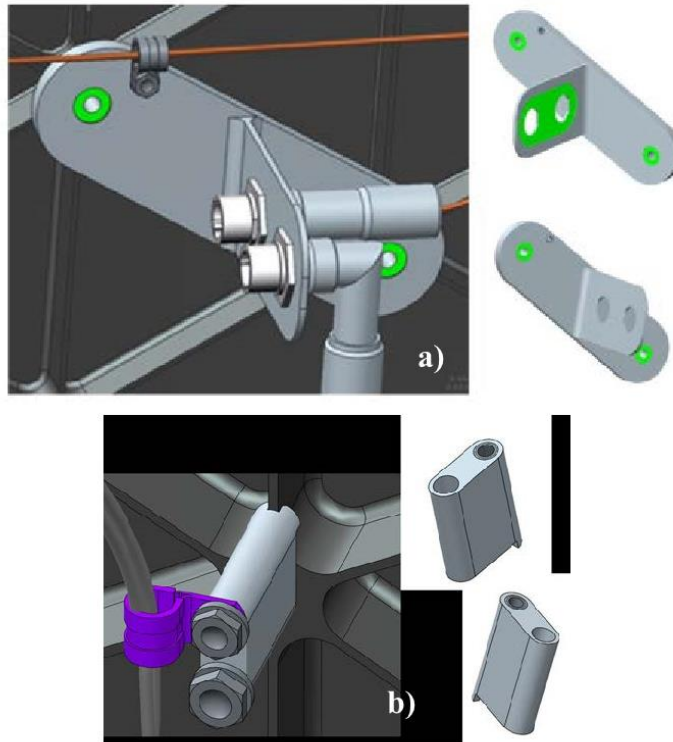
a) Cable Attach Bracket Assembly, also showing the p-clamp, and b) Cable Attach Spacers (short and tall)
